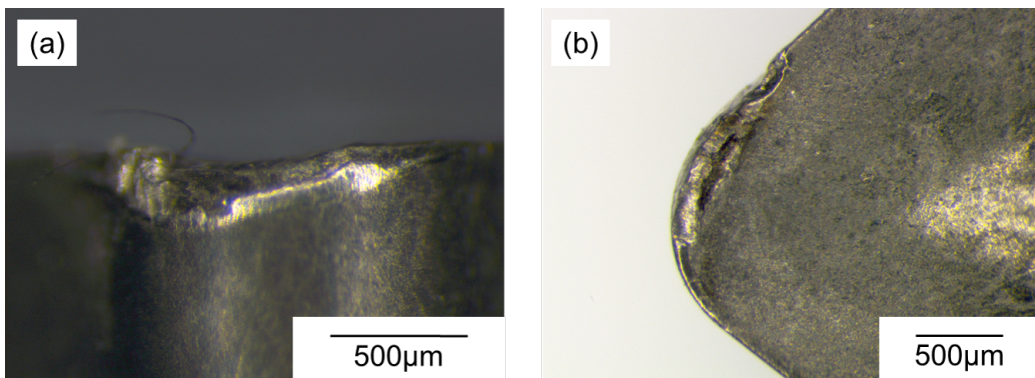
Microscope images showing the degree of tool wear after trial prep 3 on billet 4.1. Showing (a) the flank face and (b) the rake face.
